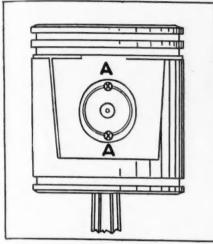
A relief, .015 to 018, in., must be filed or ground at the piston pin boss when new style piston pin locking is employed
